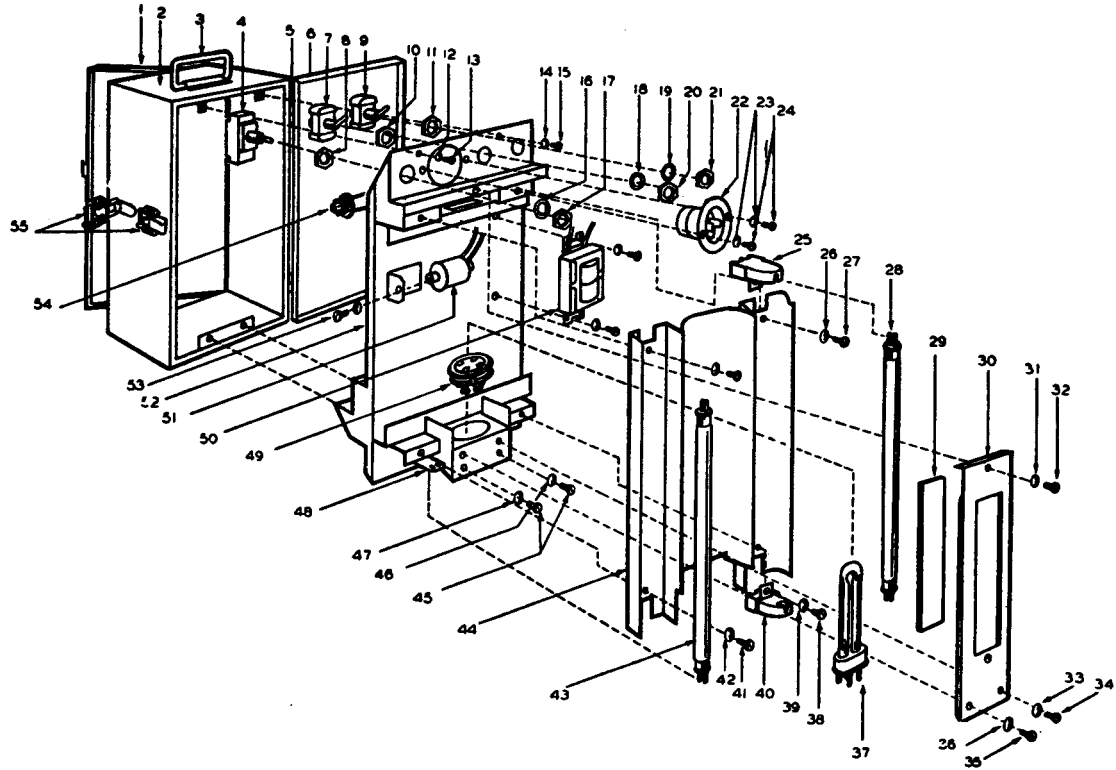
Electric Light Assembly MX-1291/PAQ, exploded view.
